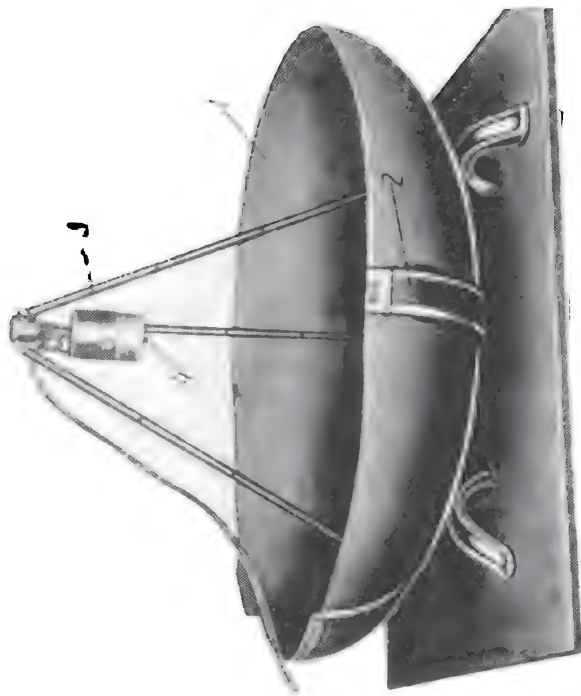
Examination of a weld in a sphere-shaped welded article in one exposure:
